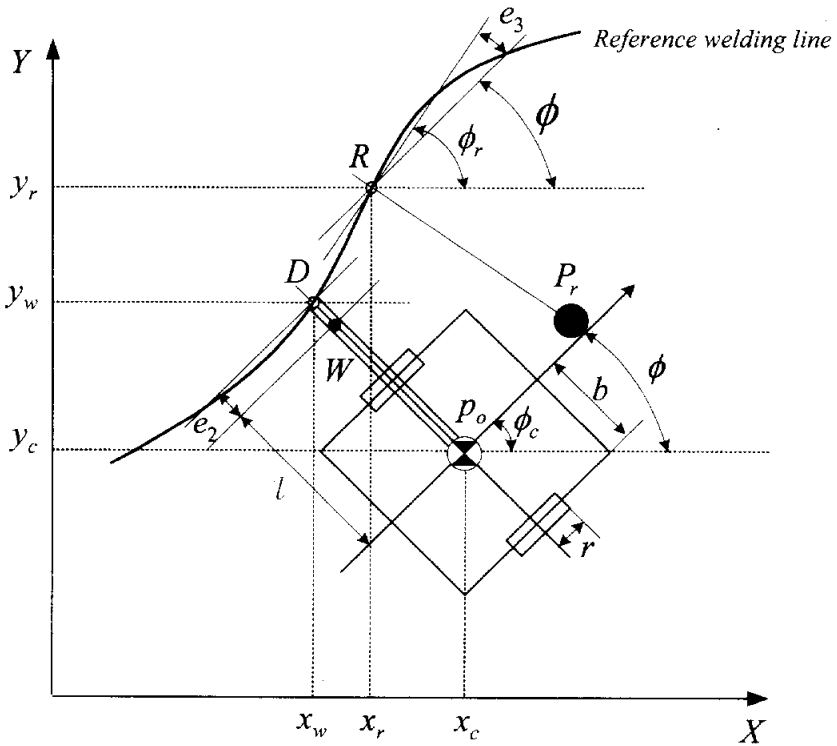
Coordinates of the two wheeled mobile robot for smooth curved welding
